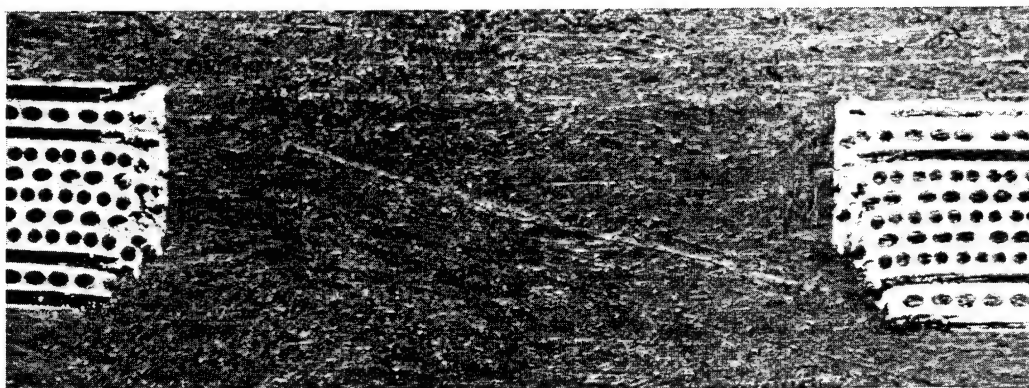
Cutting Boron/Aluminum with Diamond Coated Wheel
